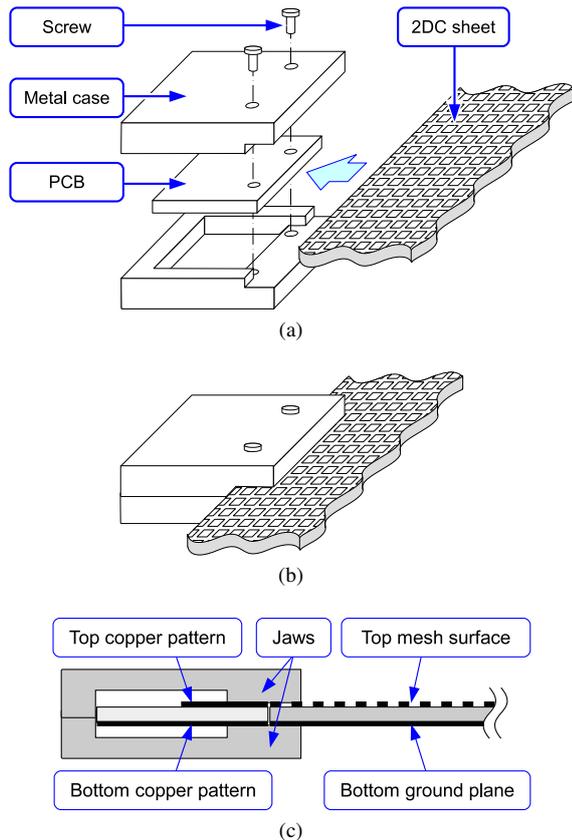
(a) Exploded view and (b) assembled view of the joint between an RFPA board and a waveguide sheet. (c) Cross sectional view. The PCB edge and the sheet edge are clamped together by the jaws of the metal cases. The top and the bottom copper patterns of the PCB are electrically connected to the top mesh surface and the bottom ground surface of the sheet via the upper and the lower jaws, respectively.
